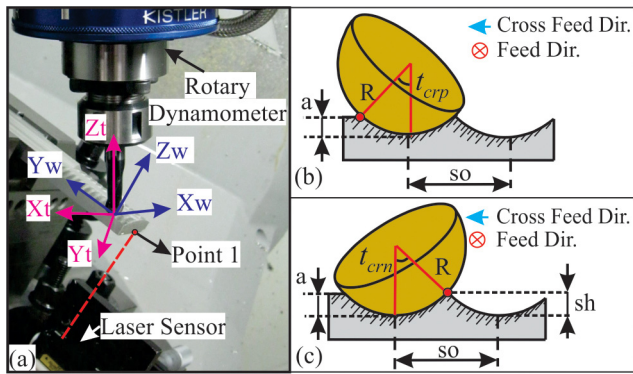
(a) 5-axis milling of flexible cantilever workpiece (airfoil blade) (b) Critical positive tilt angle, (c) Critical negative tilt angle.
